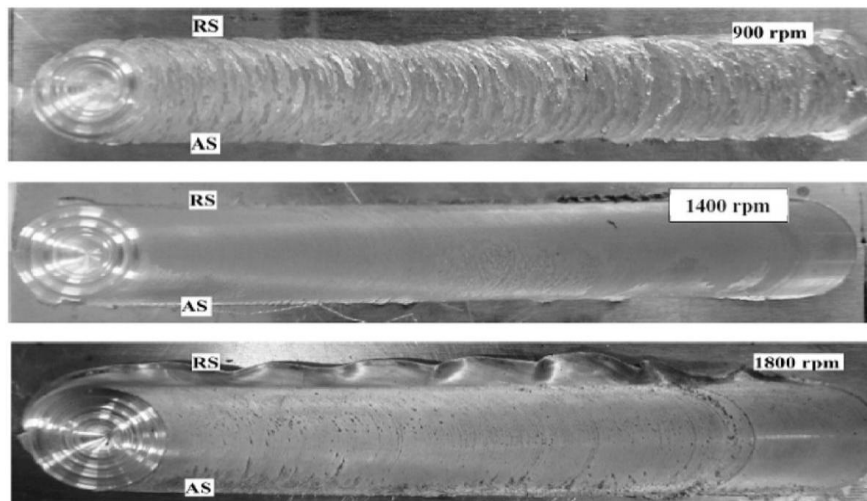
Surface appearances of 5083 aluminium alloy plates friction-stir-welded by cylindrical pin profiled tool at rotation speeds of 900, 1400 and 1800 r/min with welding speed of 16 mm/min
